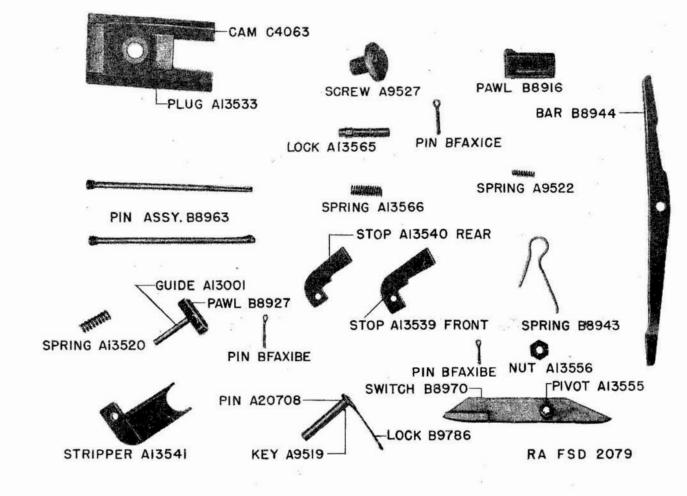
BROWNING MACHINE GUN, CAL. .50, M2, AIRCRAFT - RECEIVER - PARTS
